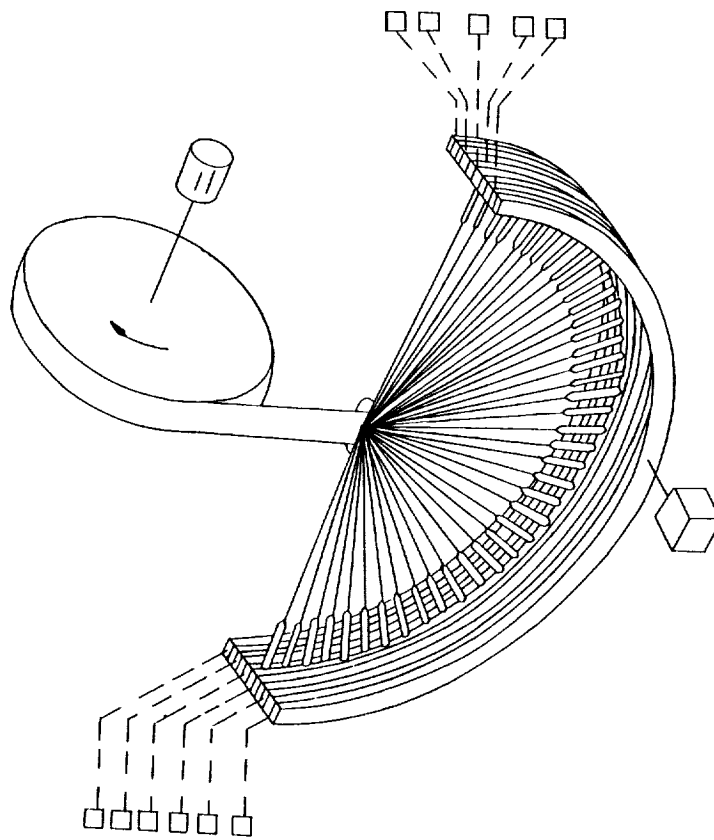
ATI CYLINDRICAL BRAIDING MACHINE
